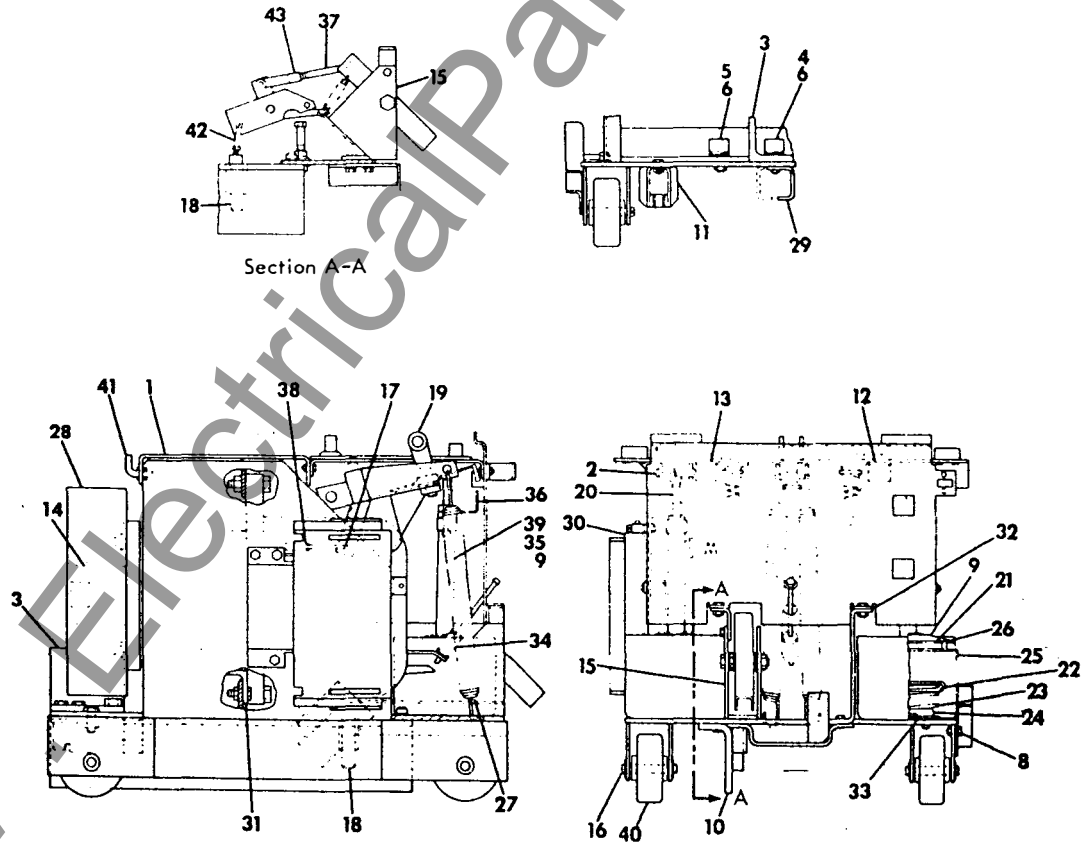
Type MA-75C, MA-250C, and MA-350C Solenoid Operator and Frame Assembly
